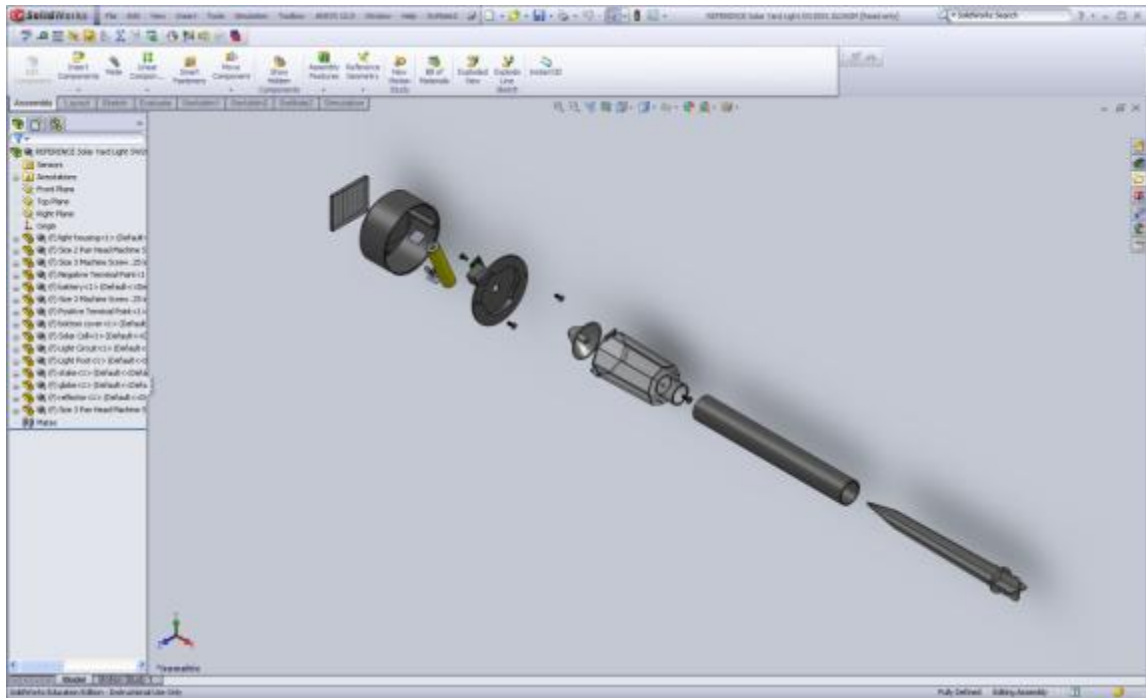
Exploded view of Solar Yard Light Reference Assembly
